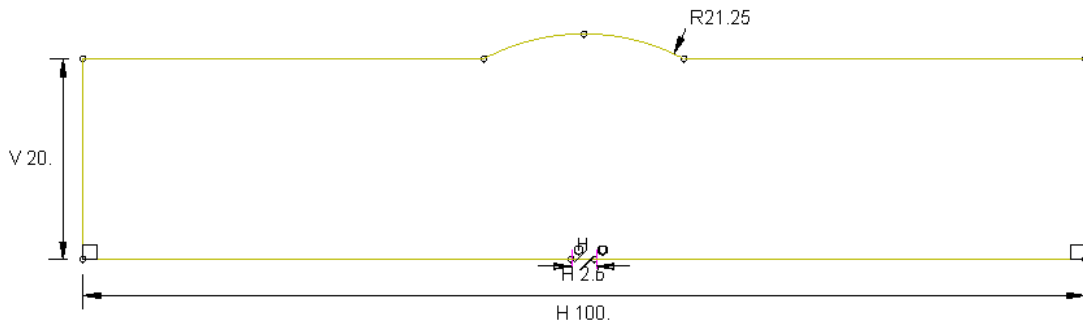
The partial penetration butt weld used in AWI analysis.
